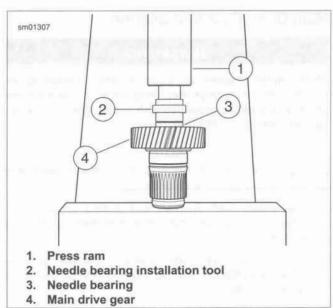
Pressing Inner Needle Bearing Assembly into Main Drive Gear
